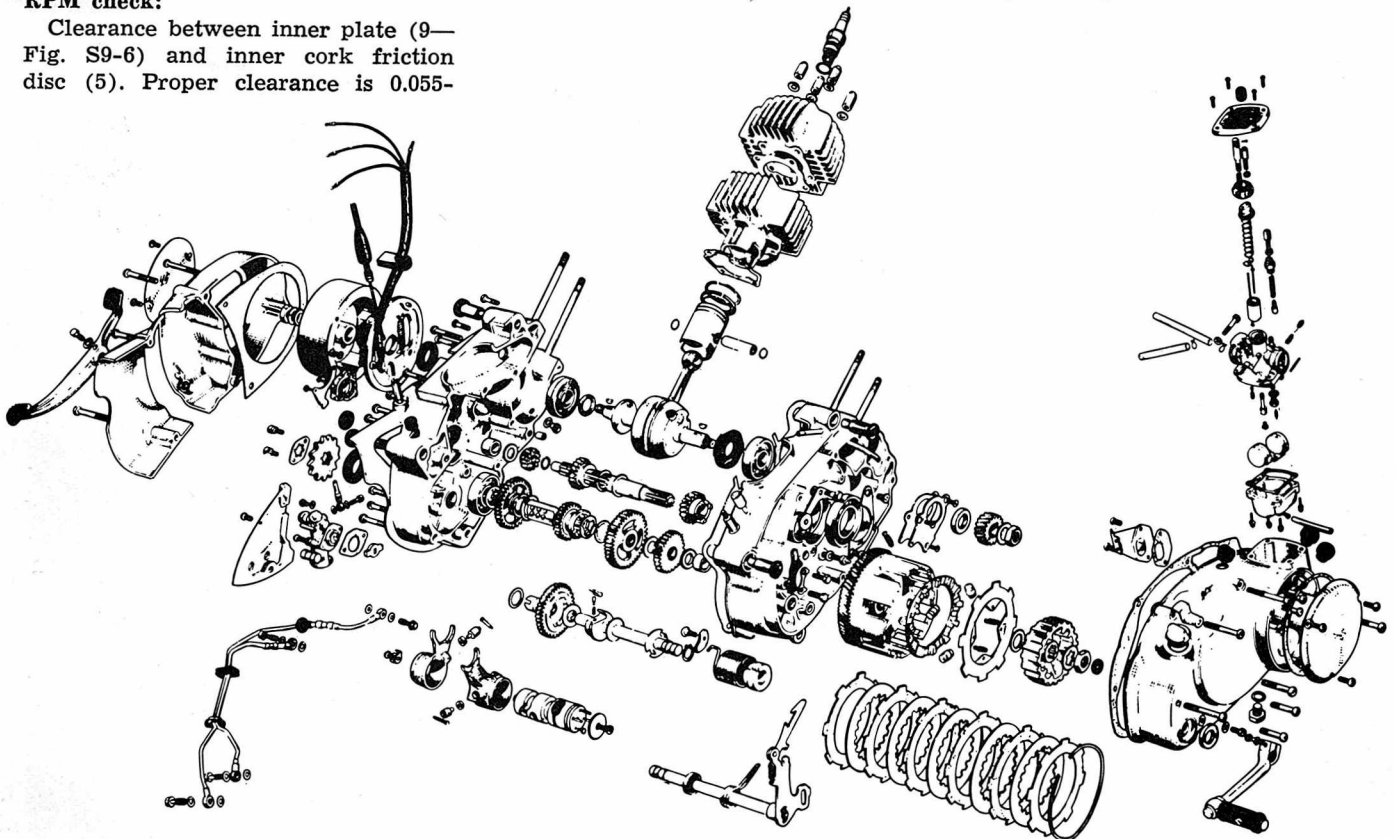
Exploded view of engine assembly used in F 50 and F 50 R models.
